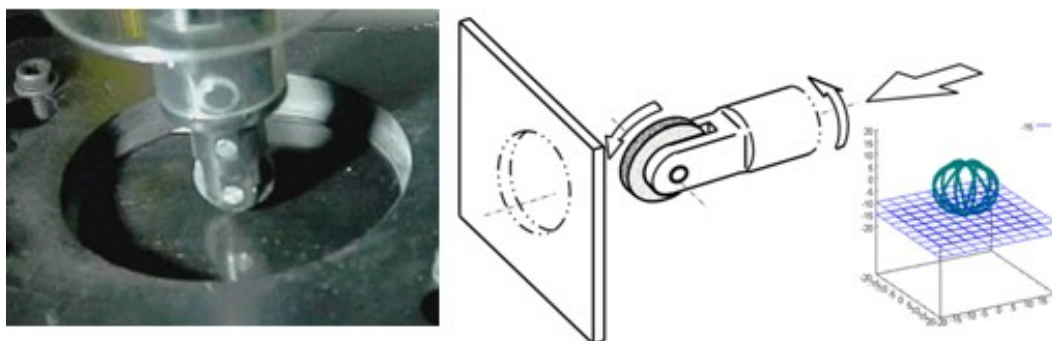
Grinding head of the gyro grinding type drill and it's movement
